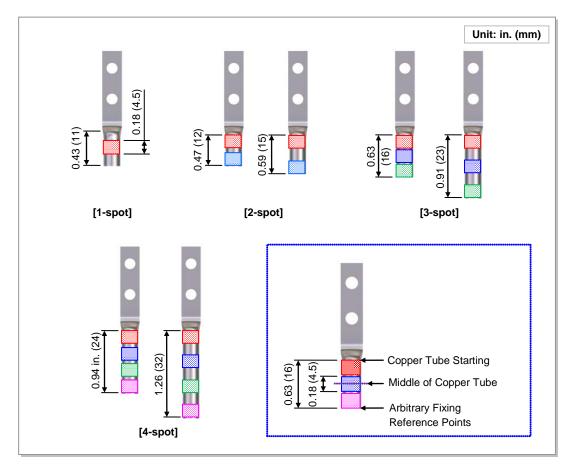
Pressure Reference Drawing (Handheld Compressor)
